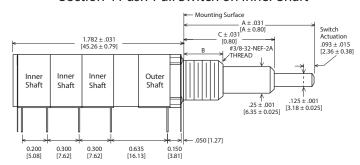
B24-13: Concentric Shafts, B24, 3 Potentiometer(s) or RS + PP, 3/8" Bushing
